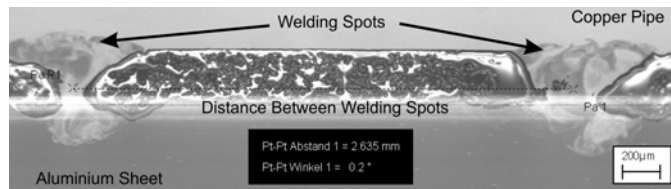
Welding Spots – Micrograph Along Axis of Pipe
